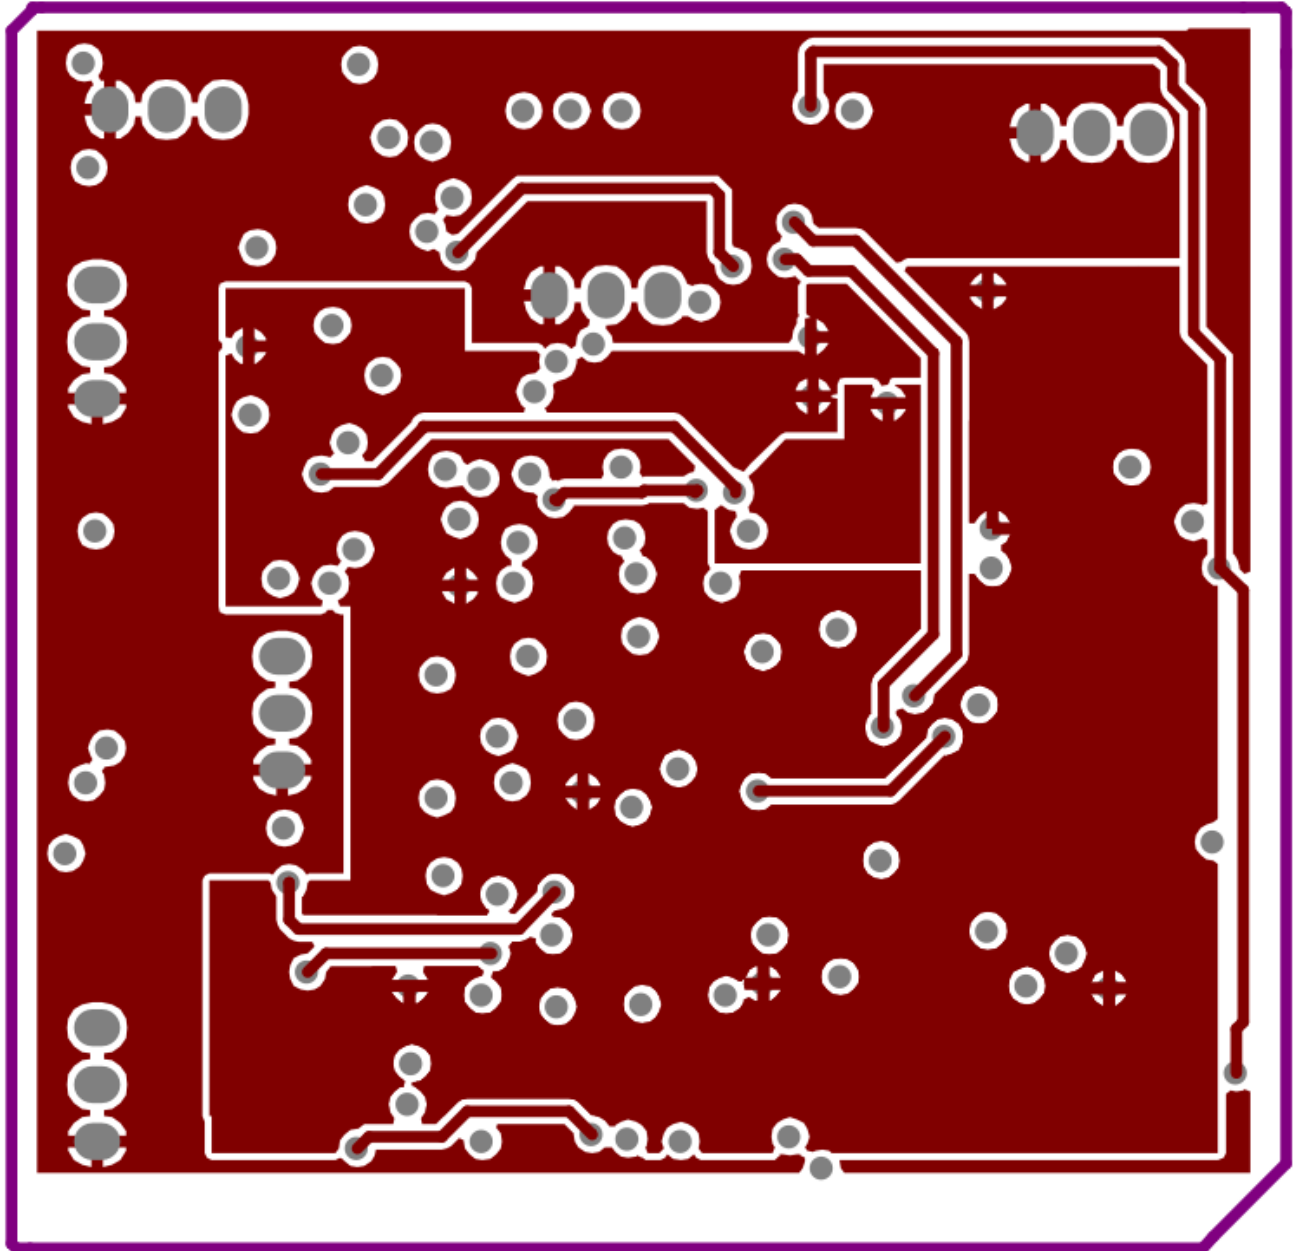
PCB layout of interior layer of node board: VCC plane.
